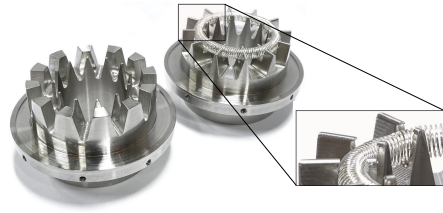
Gear-type bellows prototype: slider (left) and holder (right) parts, with the lodged coil spring in detail.
